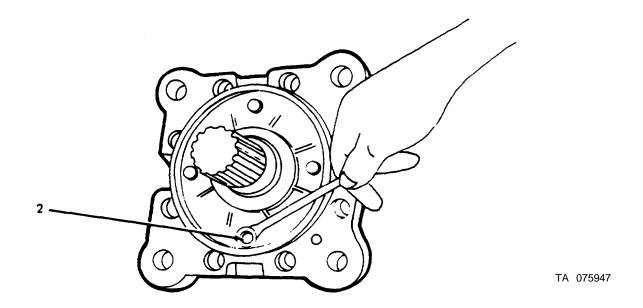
Removing Shaft Seal Retainer Capscrews.
